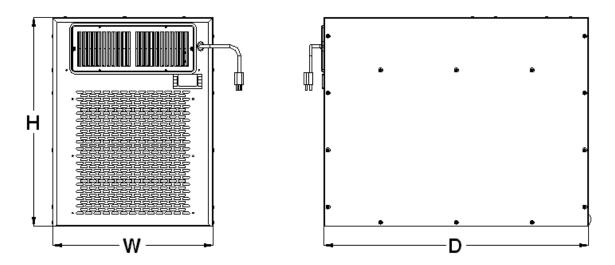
CT3500~8500ZD DIMENSIONS
